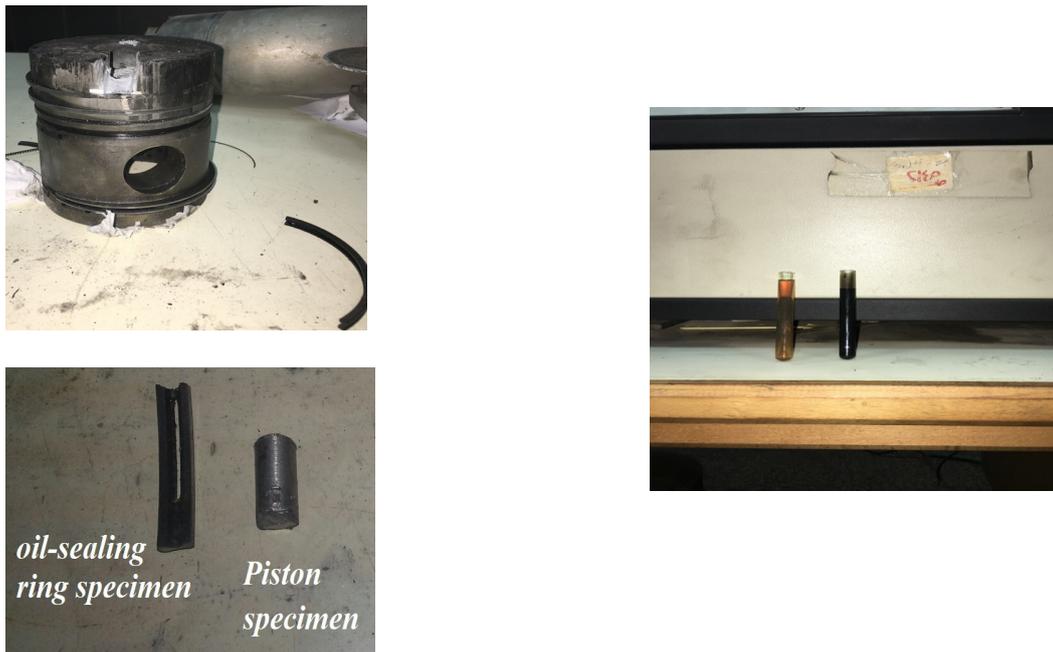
Tested engine's parts under investigation, (a) the piston with oil-sealing rings, (b) fresh and used engine oil samples.
